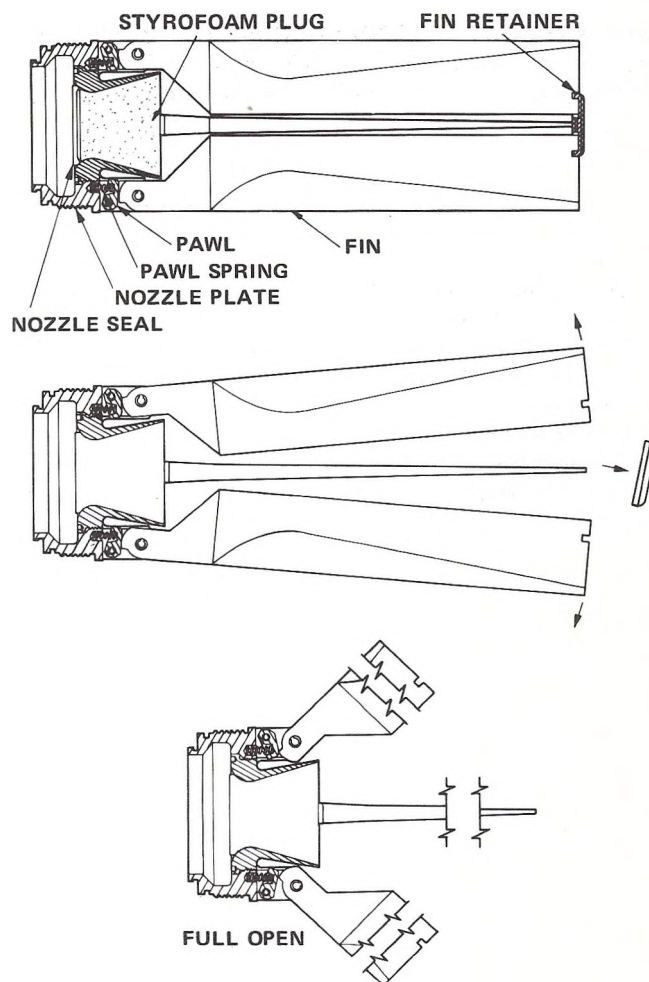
5.0-Inch FFAR Nozzle and Fin Assembly
